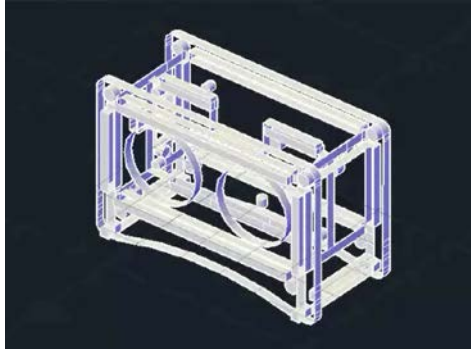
3D View of the Frame of the On-Hand Part in CAD
